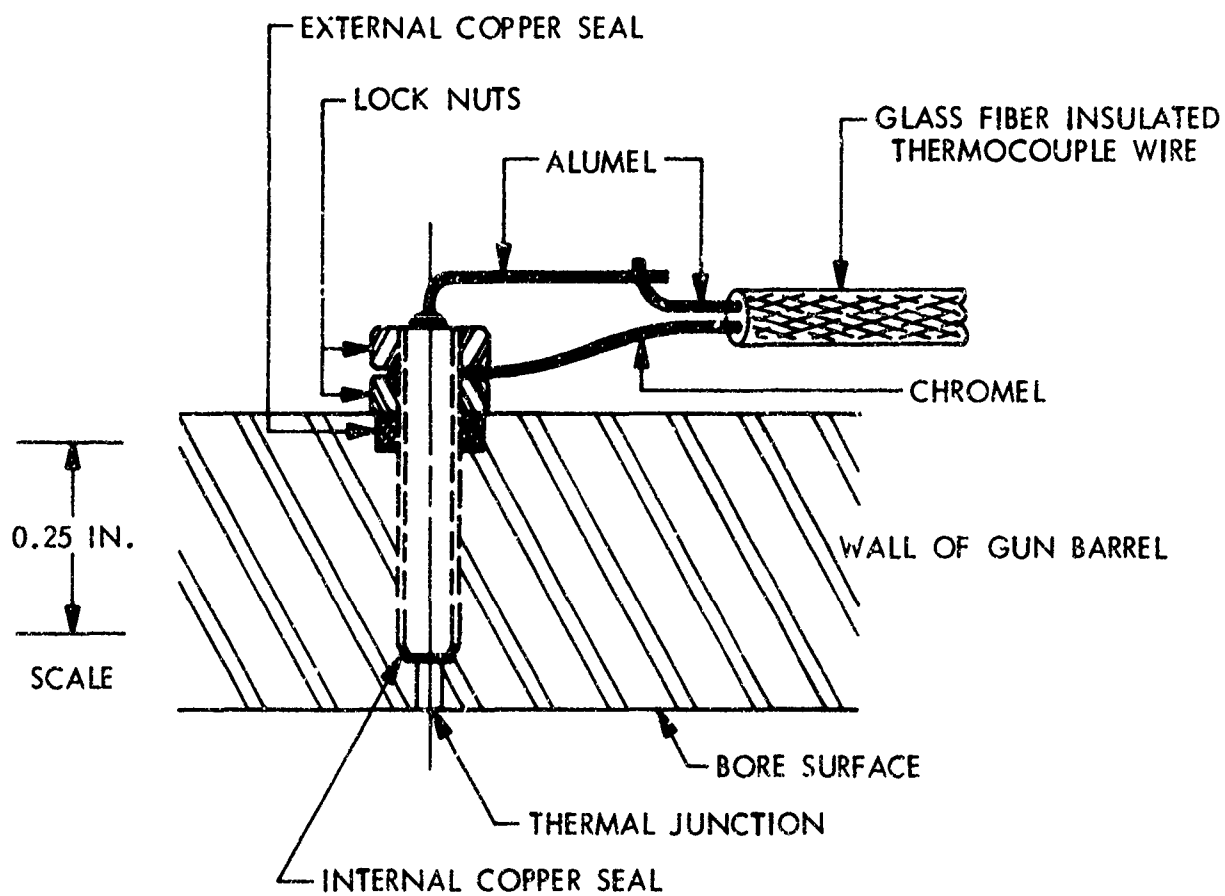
Details of Uninsulated Bore Surface Thermocouple
